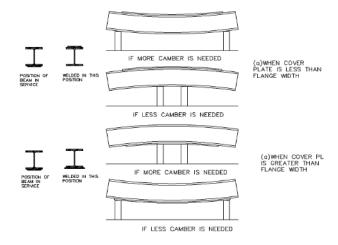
Control the direction and extents to which the beam bends before welding.
